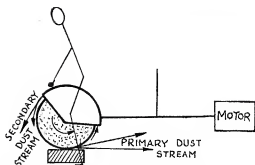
Swing Frame Grinder of "Astride" design. Grinding a Steel Casting.
